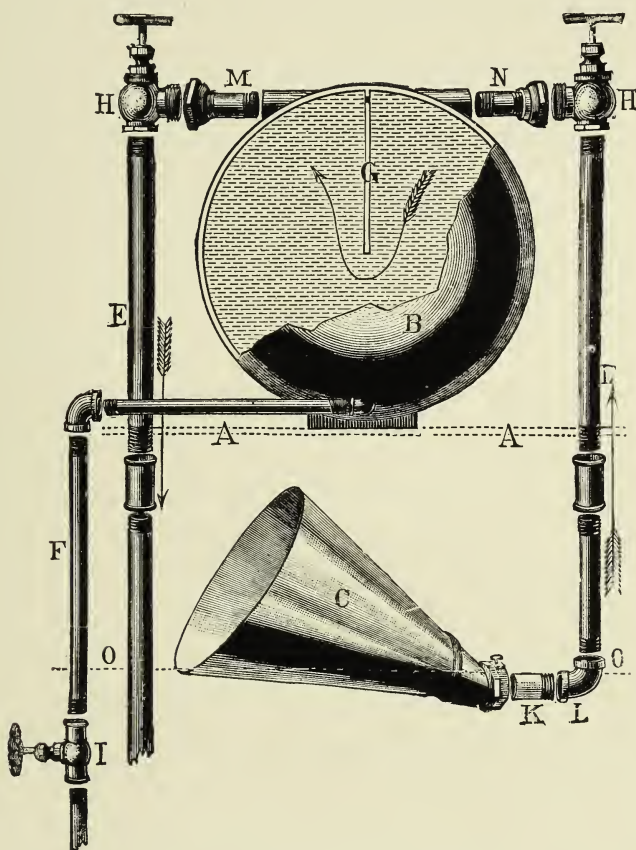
THE HOTCHKISS BOILER CLEANER.
